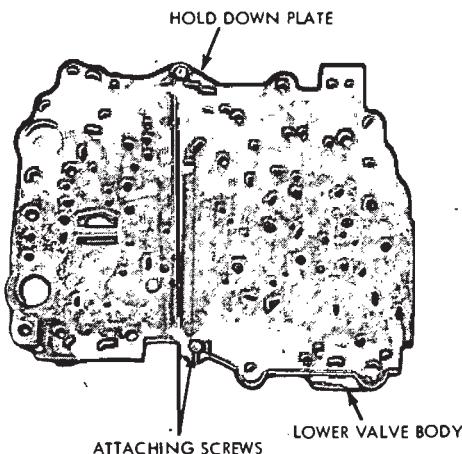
Separating Upper and Lower Valve Bodies—C4S Semi-Automatic
